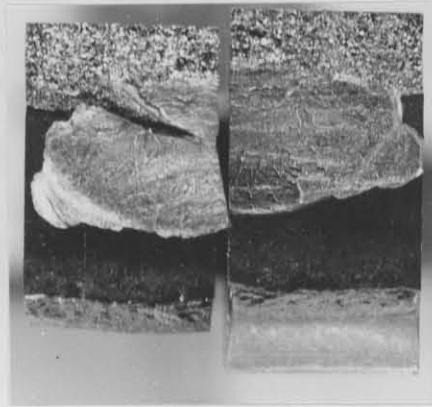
Brittle cleavage delamination fracture in a fractured 308L welded FLNFT specimen. The delamination fracture was initiated by the cleavage fracture (bright fracture surface) in the coarse grained HT HAZ.
